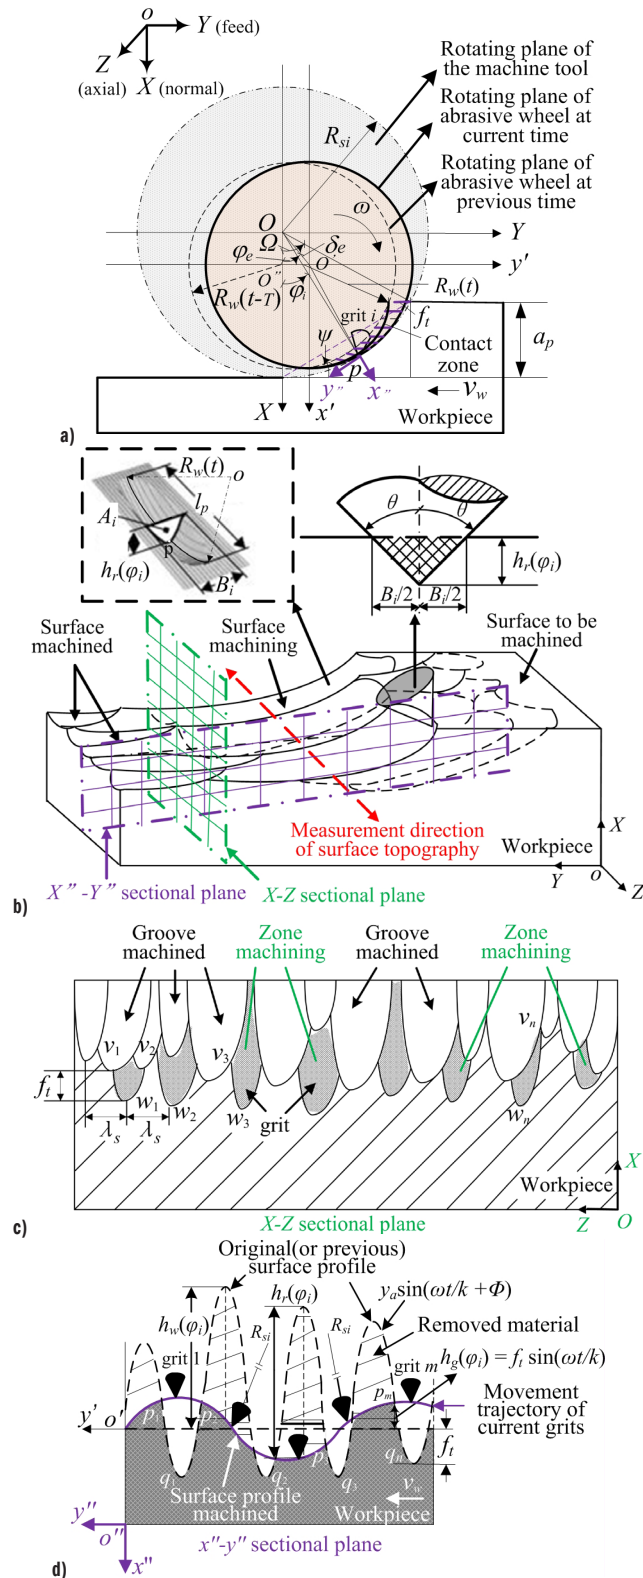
Improved kinematics model and material removal model under condition of eccentrically rotating of wheel in a precision grinding process; a) kinematics model of precision grinding; b) the 3D surface topography processed by continuous abrasive grits and single groove by an abrasive grit; c) the microcosmic surface topography processed by continuous abrasive grits in one $X-Z$ sectional plane; and d) the microcosmic surface topography processed by continuous abrasive grits in one $X''-Y''$ sectional plane
